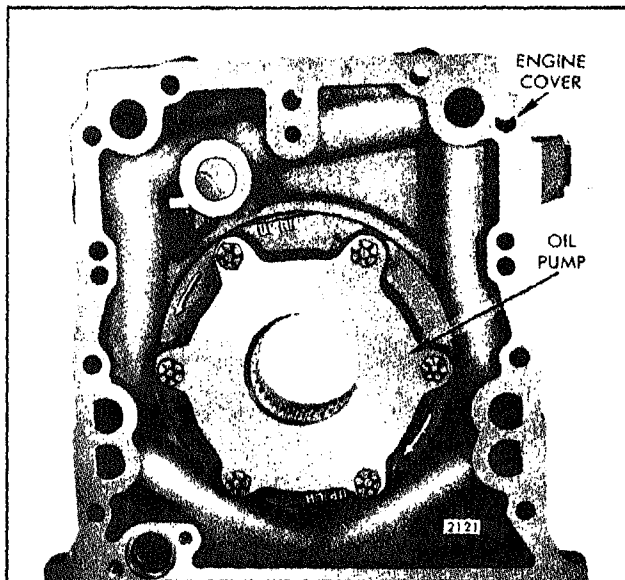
Typical Right-Hand Rotation Lubricating Oil Pump Mounting
